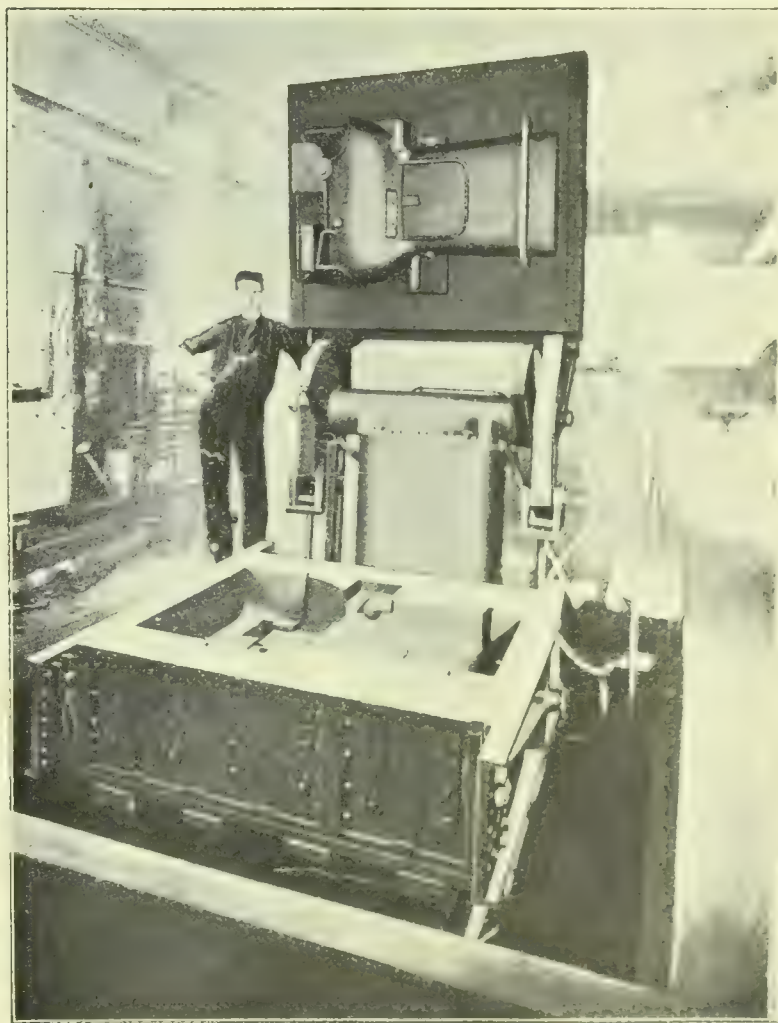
GRINDER FRAME MOULD, MADE ON MACHINE SHOWN IN FIG. 8.
